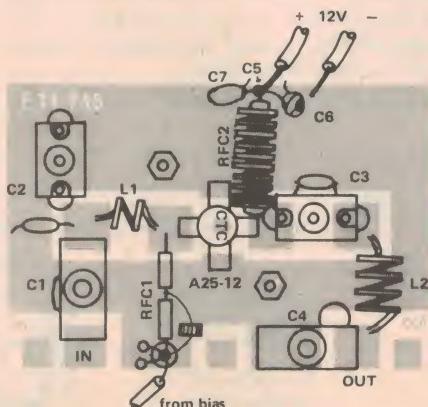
Construction and component layout of the ETI-715A 25W six metre amp.
